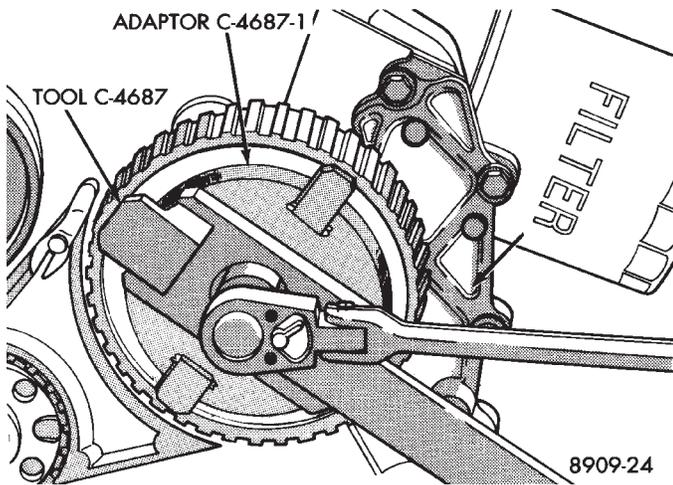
Removing/Installing Intermediate Shaft Sprocket
